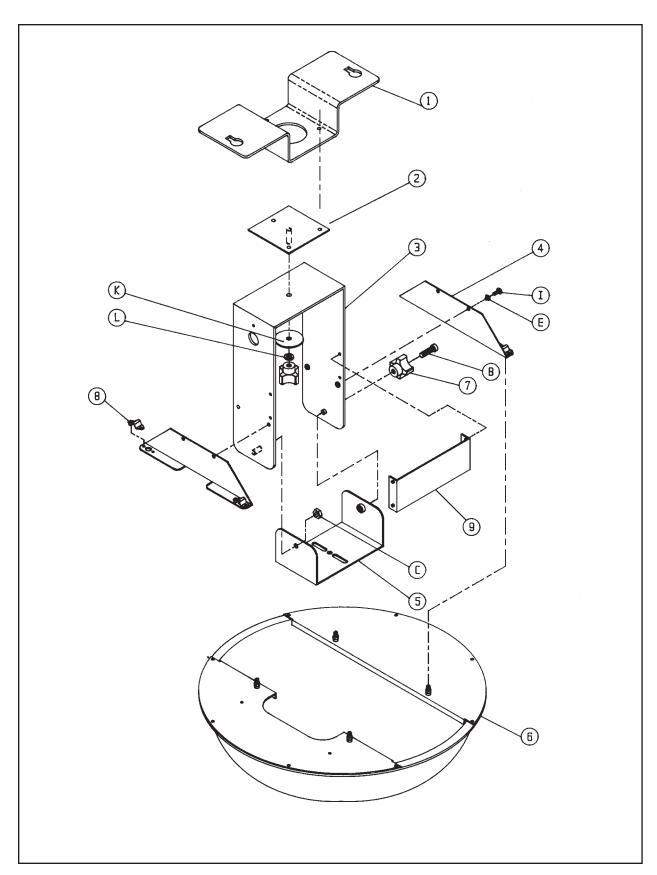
SB26 Fixed Series Exploded Assembly Diagram
